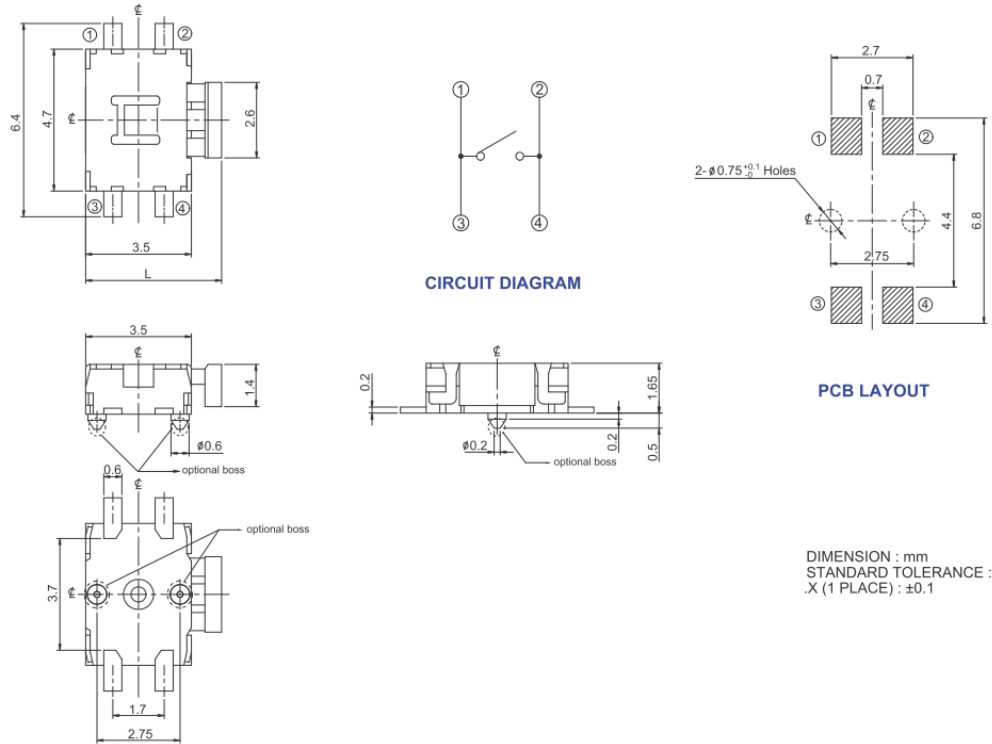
223HM...G Surface Mount Gull Wing, With Ground Terminal
